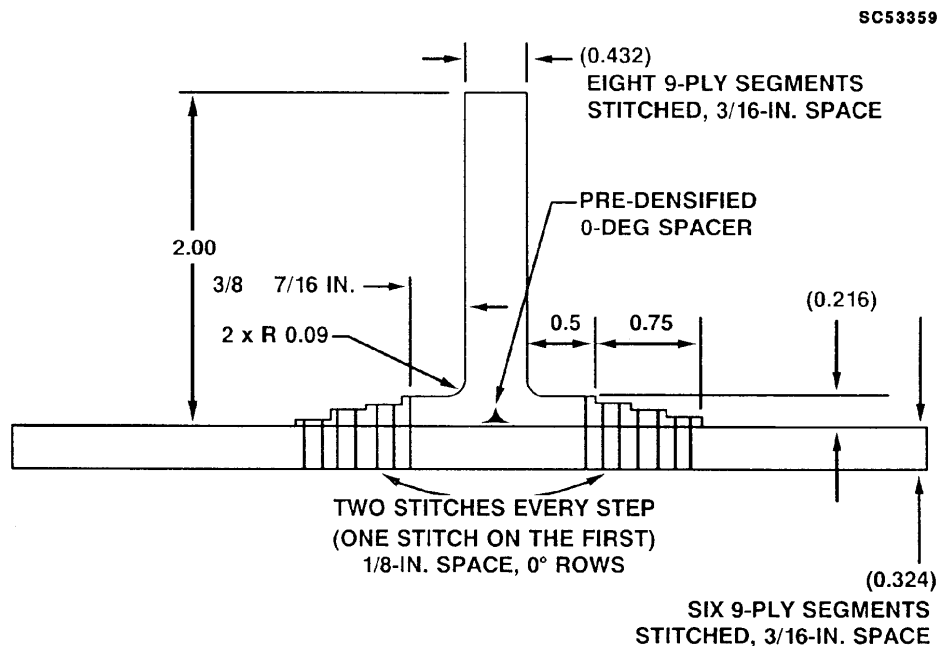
A stitched skin/stiffener assembly. (From Ref. [2.30])
